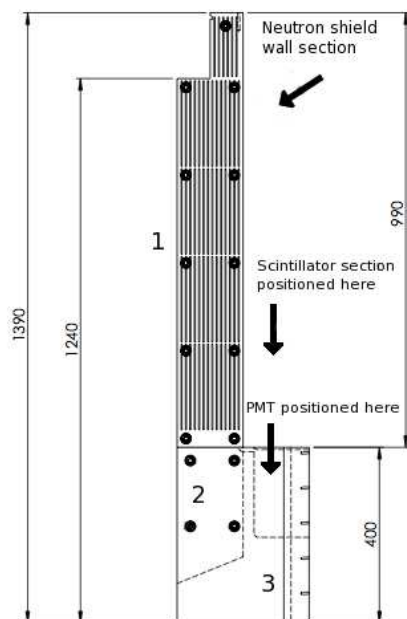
CAD drawing of the neutron shield wall and base section. The numbered sections are discussed in the text. Some dimensions are also shown.
